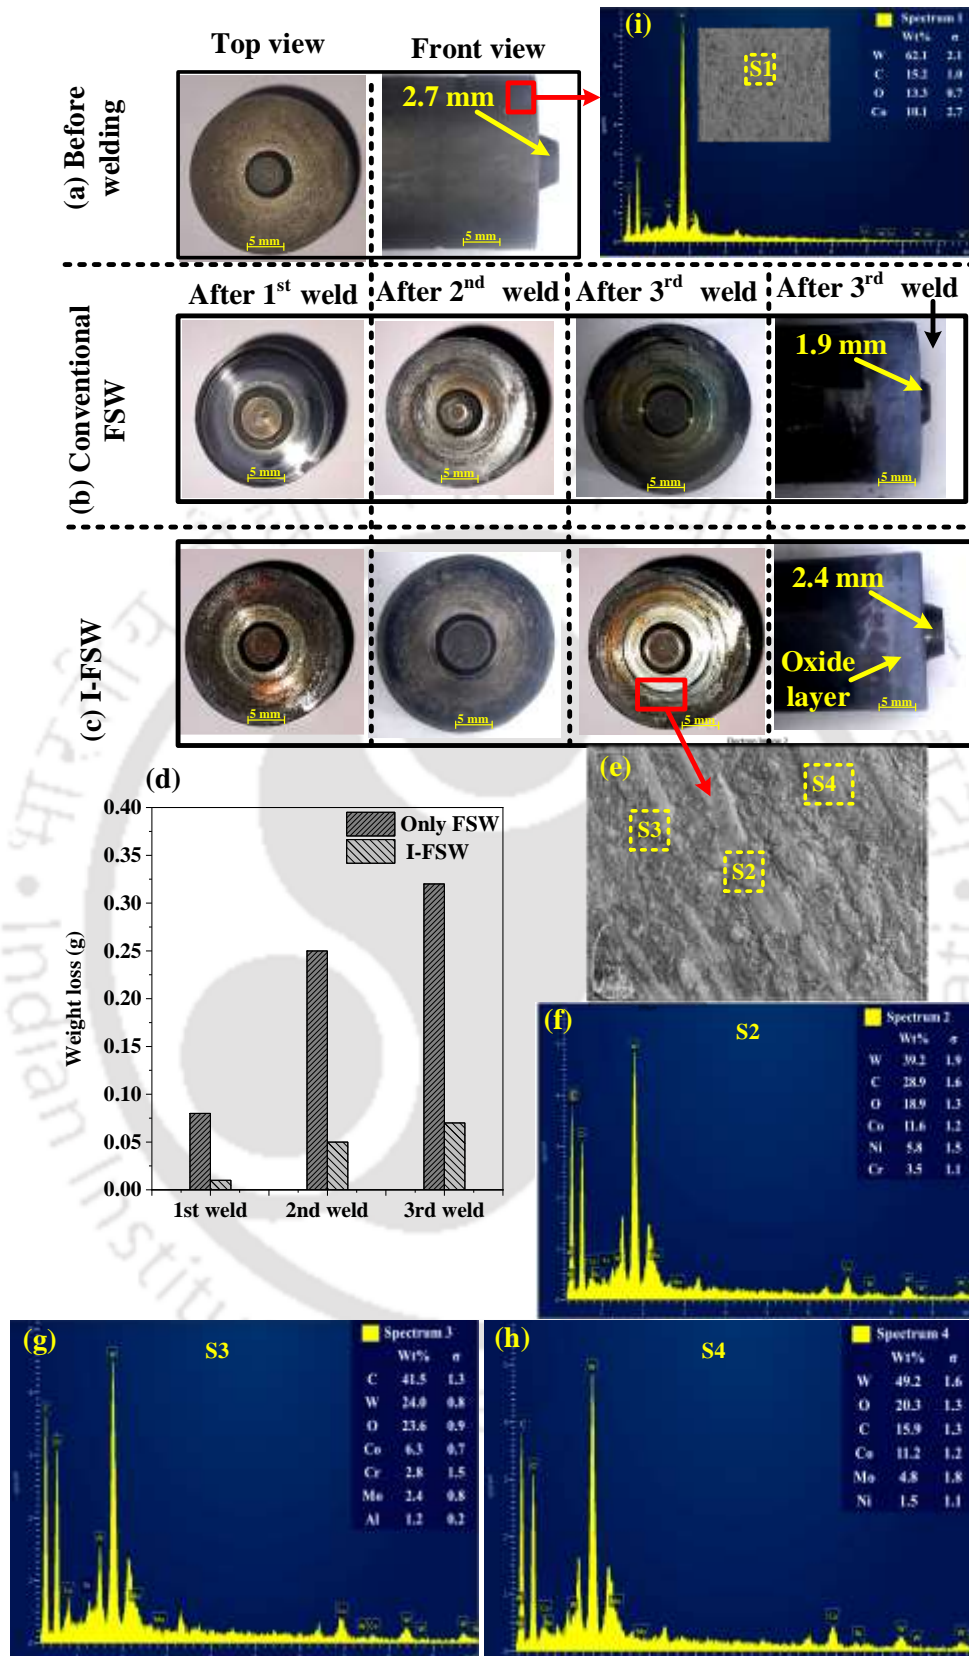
Top and front views of the FSW tool (a) before welding, (b) after conventional welding, (c) after I-FSW, and its analysis represented in (d) weight loss graph, (e) tool shoulder portion and (f-i) EDS analysis of tool shoulder.
